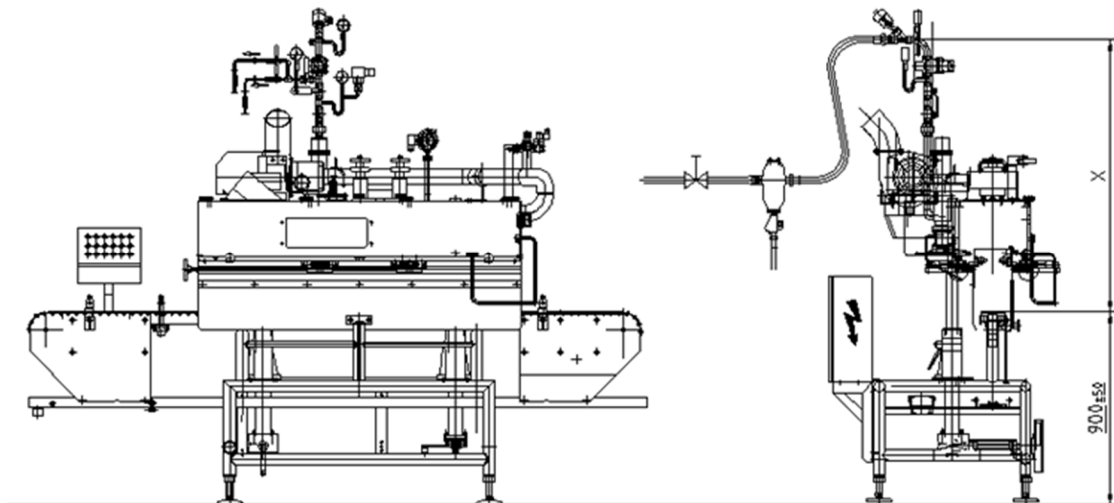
The Indicated Height of 900mm for the Conveyor is a Standard Dimension
